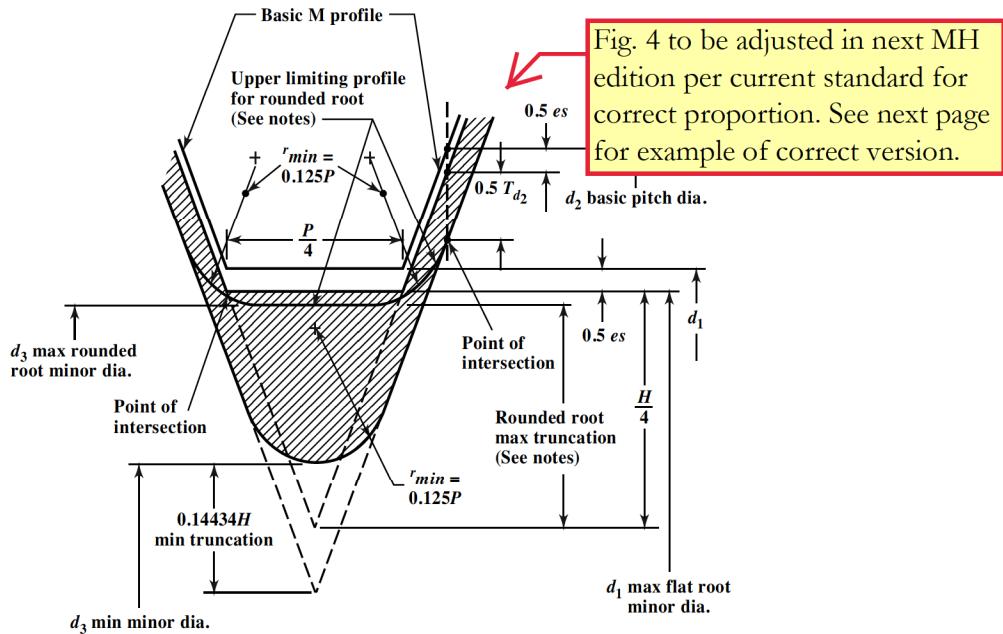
M Profile, External Thread Root, Upper and Lower Limiting Profiles for $r_{min} = 0.125 P$ and for Flat Root (Shown for Tolerance Position g)
